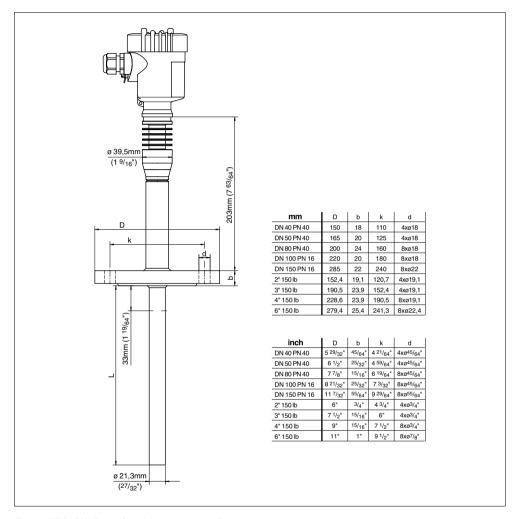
VEGAPULS 62 - Standpipe version with flange18)
